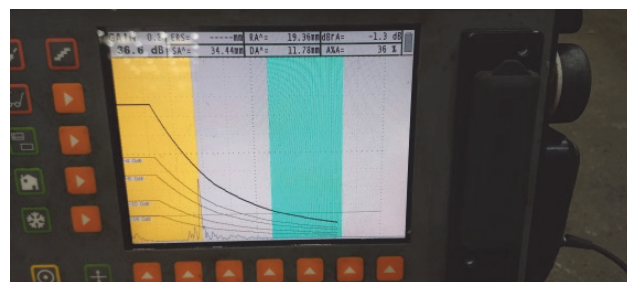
A scan of the defect found in the filled area of the weld
